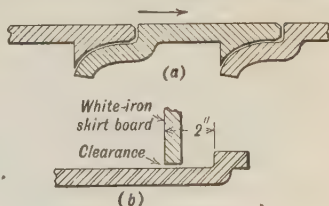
Transverse (a) and longitudinal (b) sections of manganese-steel platens on apron feeders at Inspiration.
